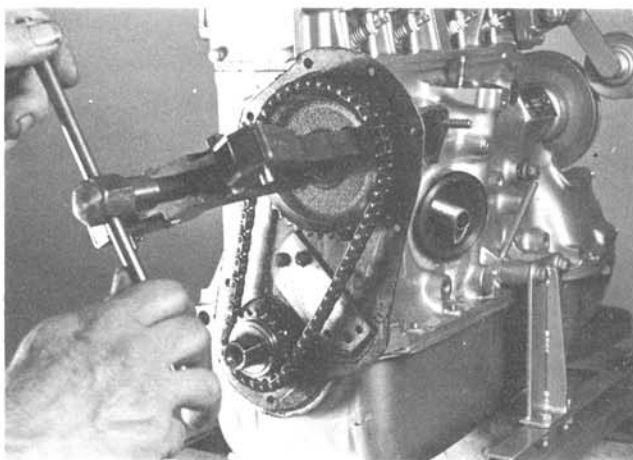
REMOVING CAMSHAFT SPROCKET
